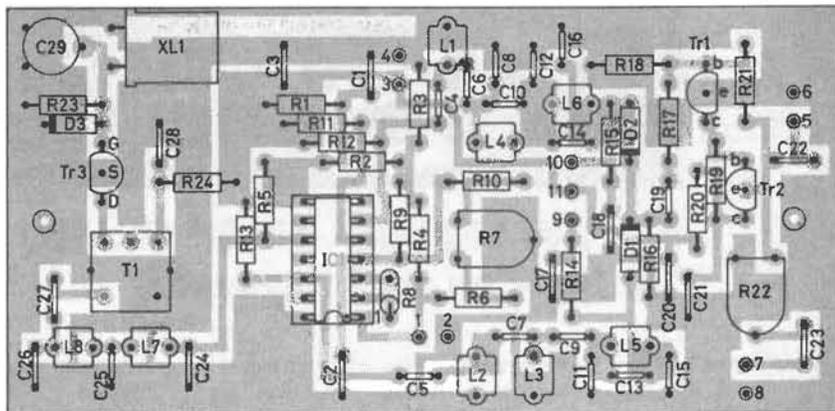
The component layout and p.c.b. track pattern, shown full size, for Board 4
